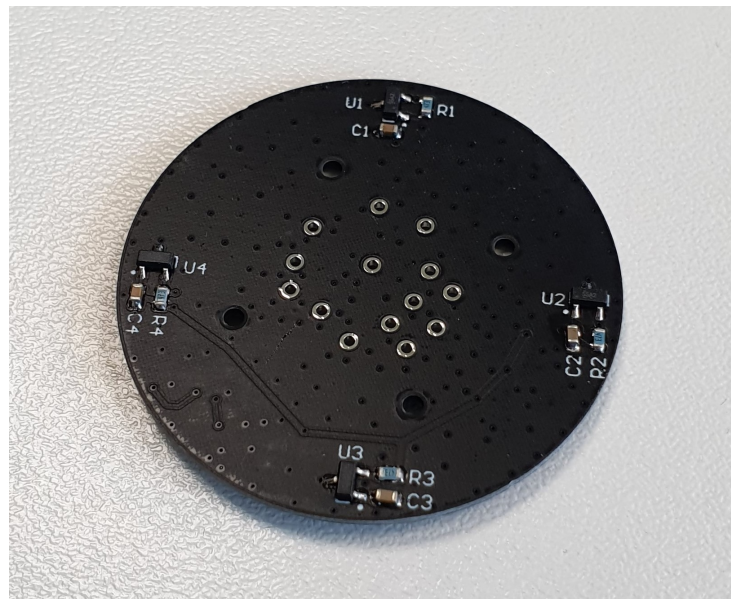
The other side of the PCB contains sensors for the push buttons.
